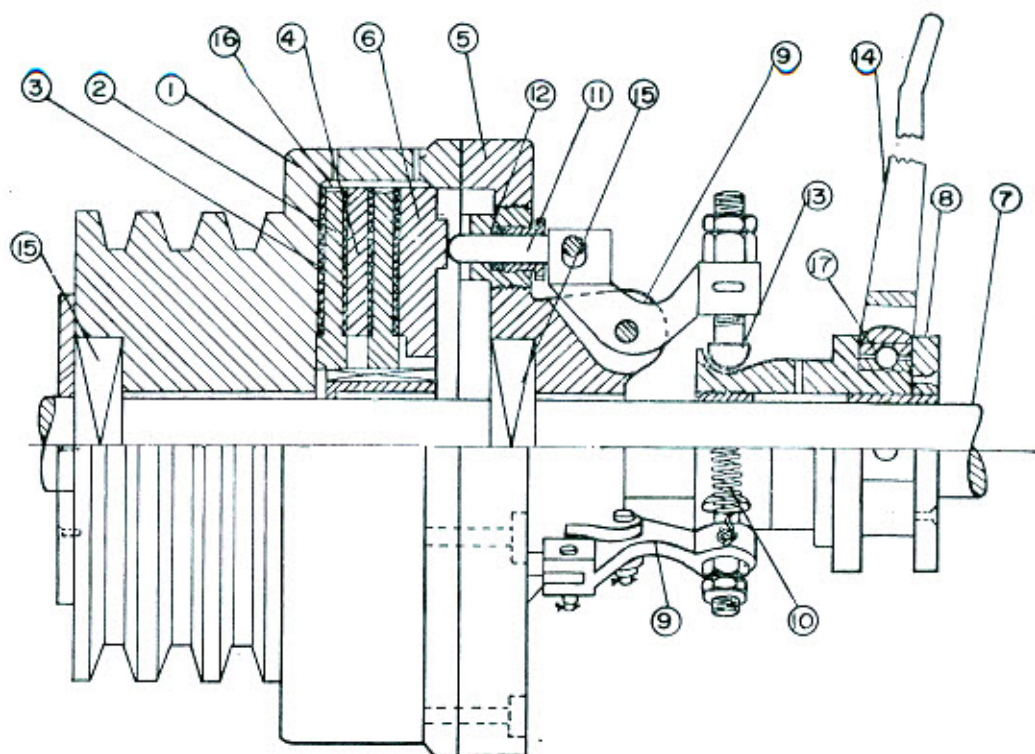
Clutch [1, Outer drum; 2, driven plate; 3, driven plate lining; 4, driving plate; 5, cover; 6, pressure plate; 7, shaft; 8, sleeve; 9, bell-crank lever; 10, spring; 11, pressing pin; 12, stuffing gland arrangement; 13, adjusting screw; 14, operating lever; 15, ball bearing; 16, key; and 17, double purpose ball bearing]
